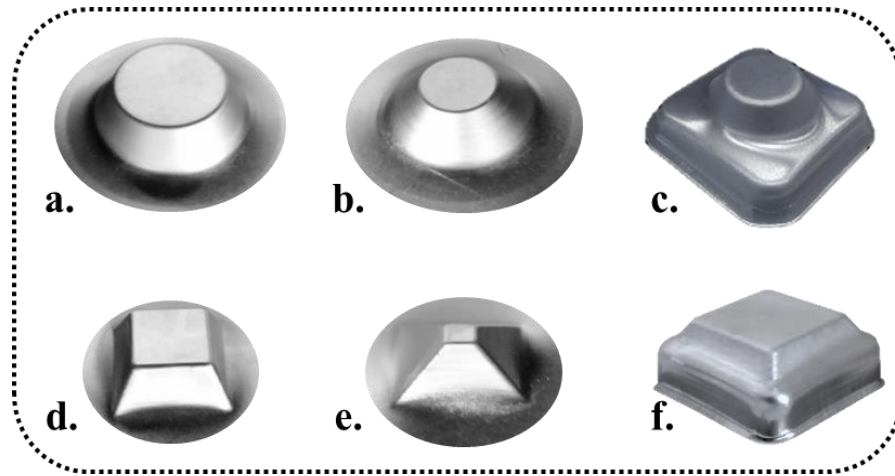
Obtained parts with the part IDs: a) 6; b) 3; c) 8; d) 13; e) 10; f) 16.
